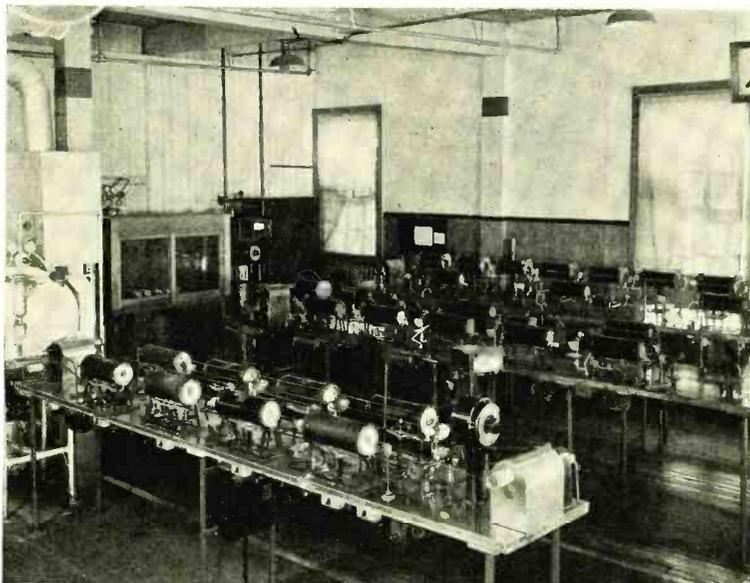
EQUIPMENT USED FOR CONTINUOUS COATING OF HEATER WIRE AND NICKEL FILAMENT.
